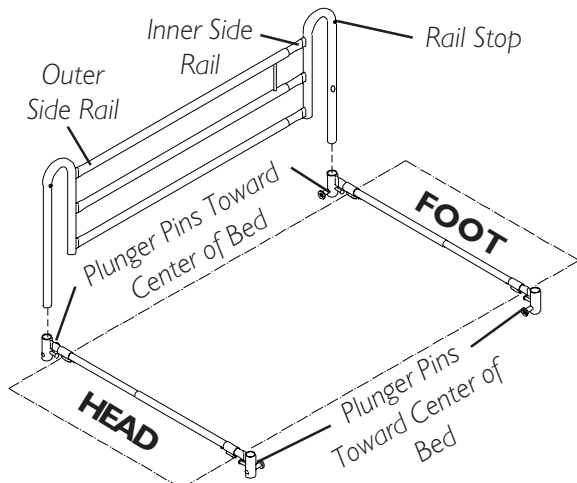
INSTALLING THE CROSSBRACES
